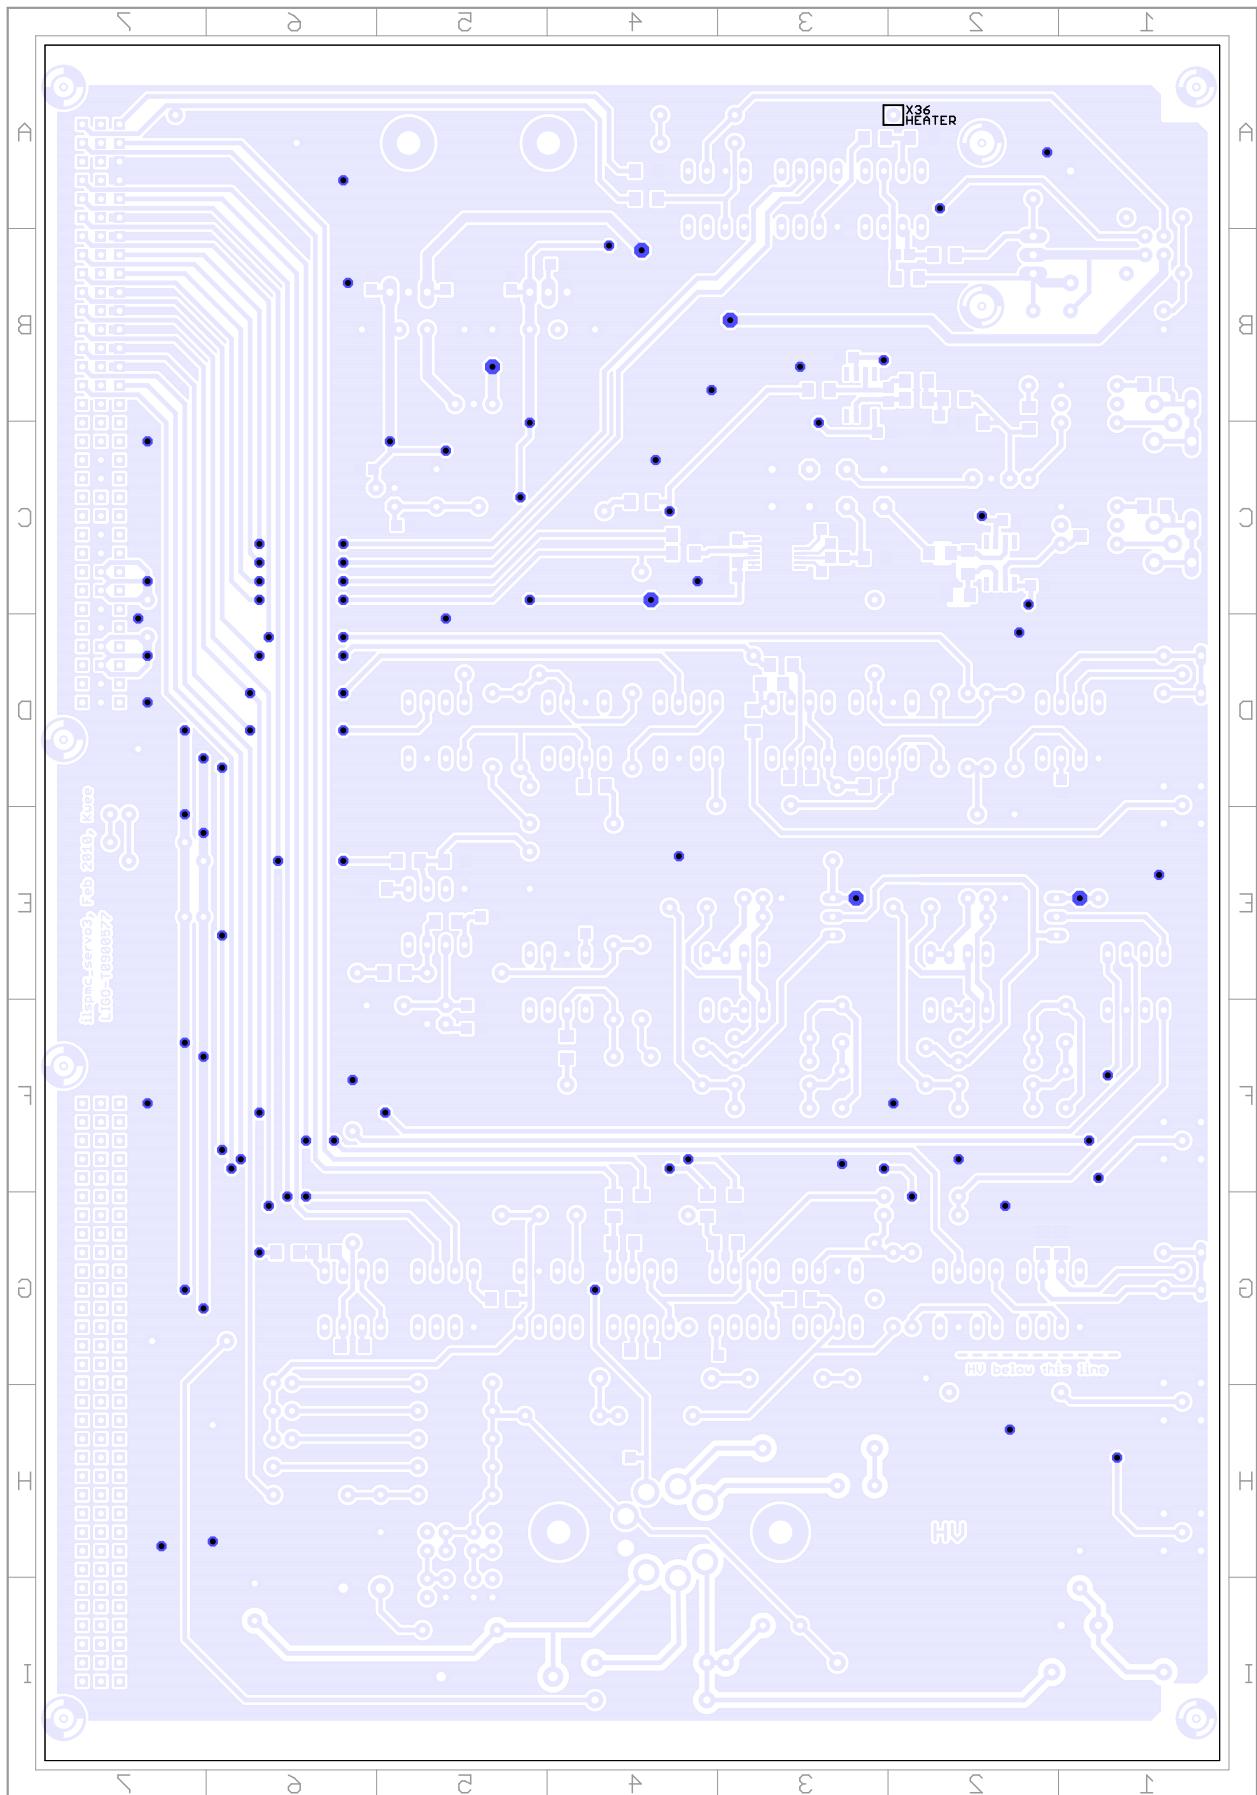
Board bottom view showing connectors, test points, vias and wired components
